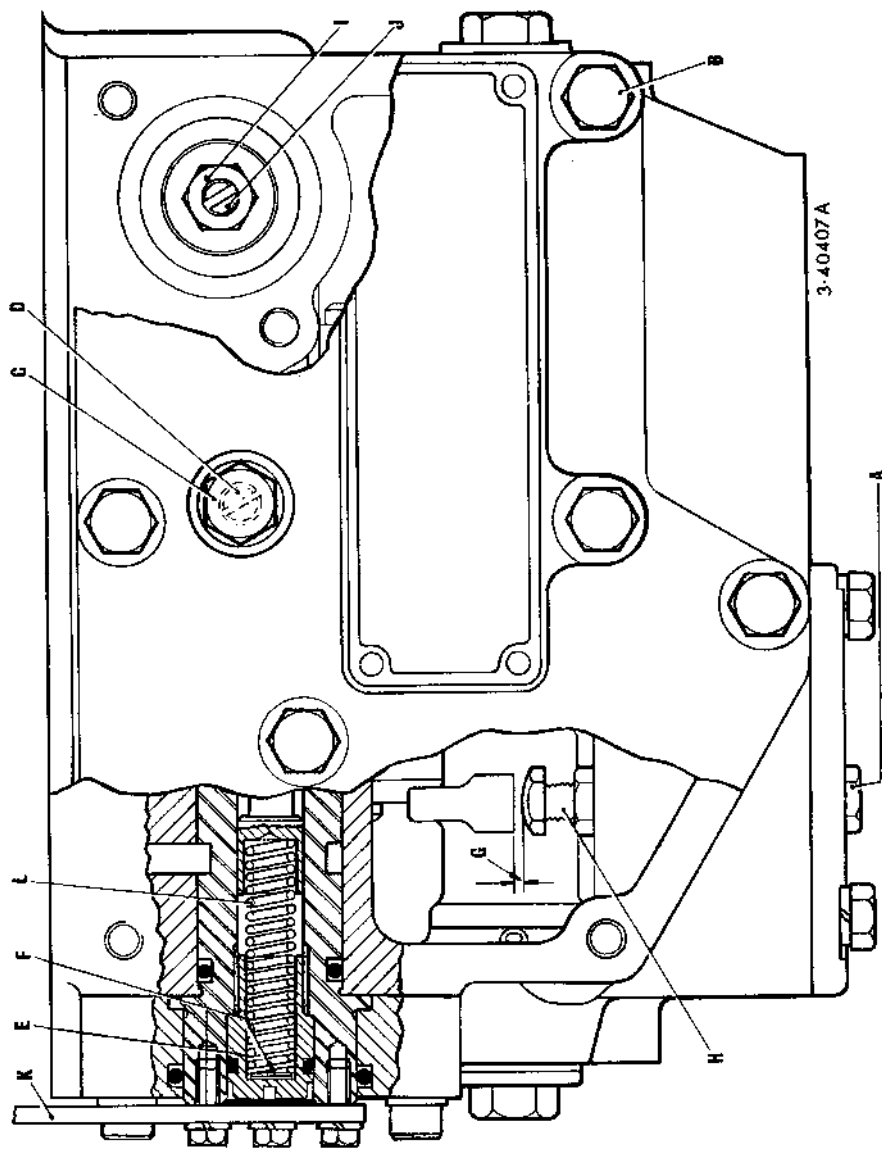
Lister Reverse Gear—Hydraulic operated, Control adjusting
